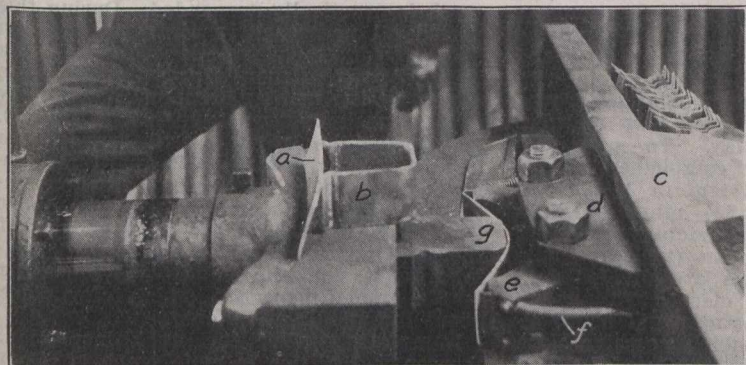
Forming Straddle Member of Superheater Tube Clips.
